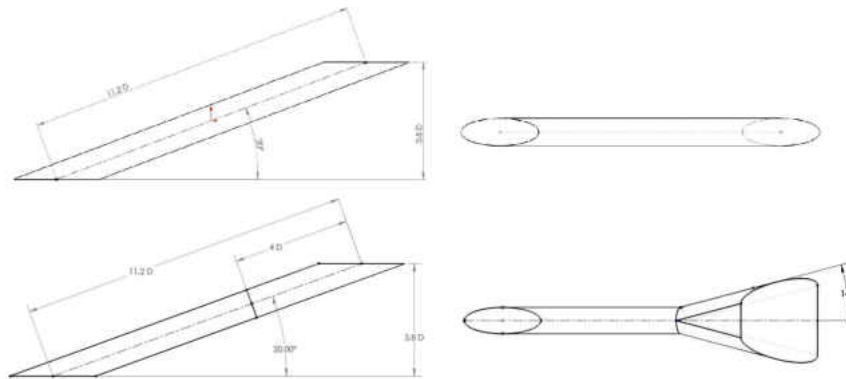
Cylindrical hole (top) and fan-shape hole (bottom)
